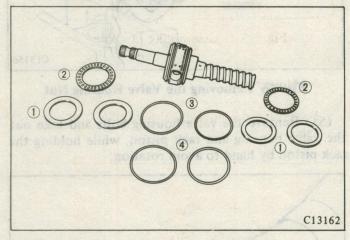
Disassembly of Input Worm Unit and Needle Bearing, etc.
